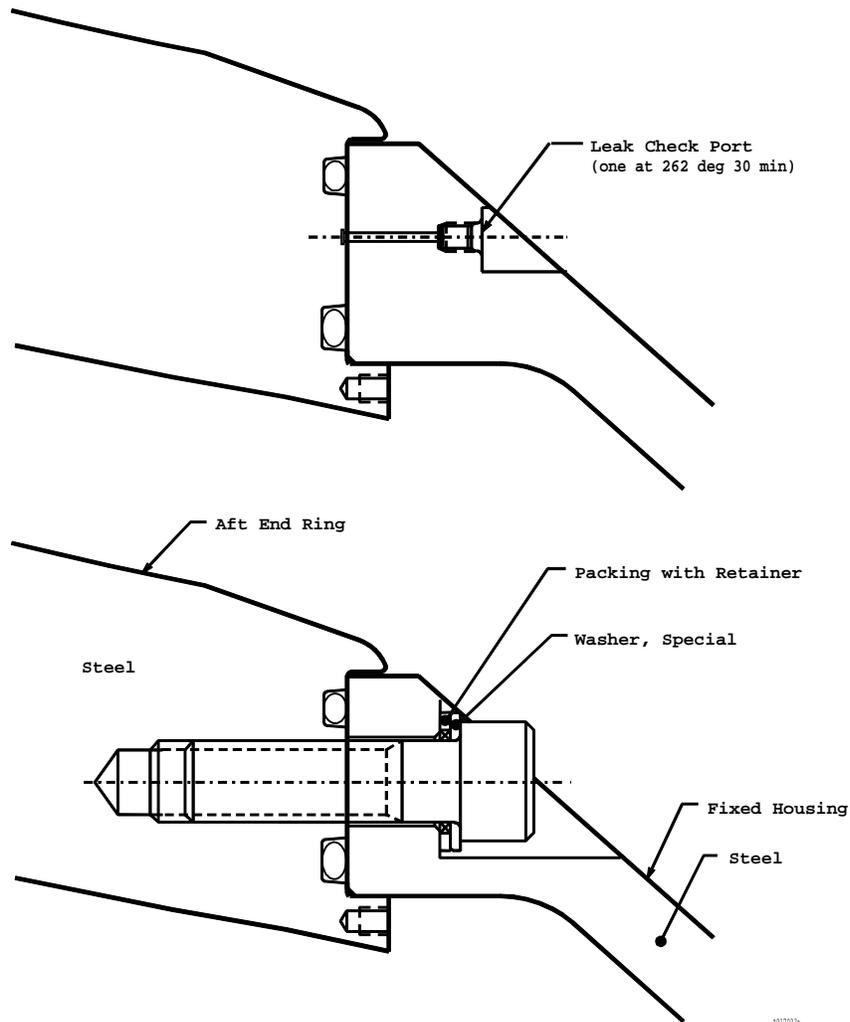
Fixed Housing Assembly-to-Aft End Ring Joint, Metal Components
